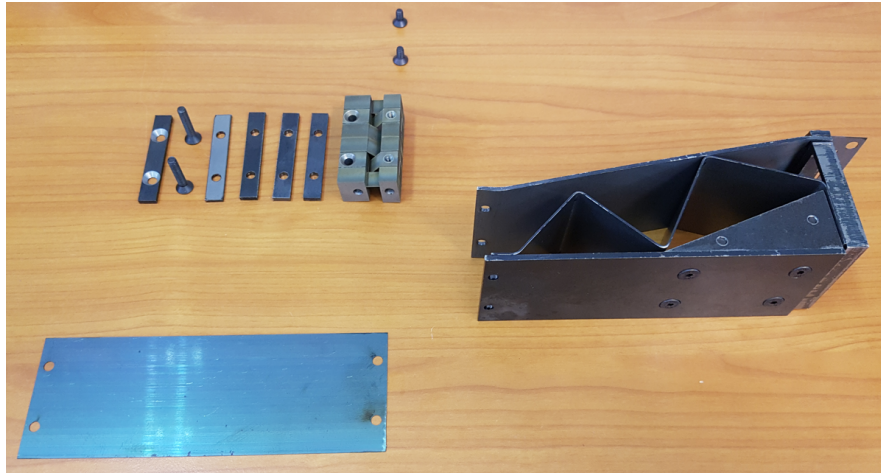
Fastening the short wall and 1 mm plate to the triangular block. On top of the short wall component, 2mm top cover plate, short flexure and a cover plate is installed.
